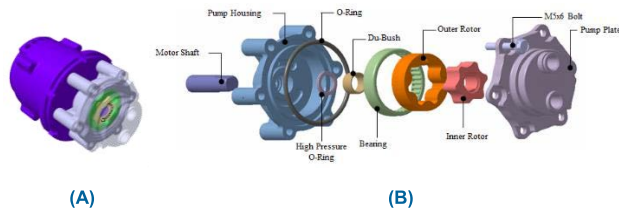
Gerotor pump for the active force module: (a) assembly; (b) exploded view.
